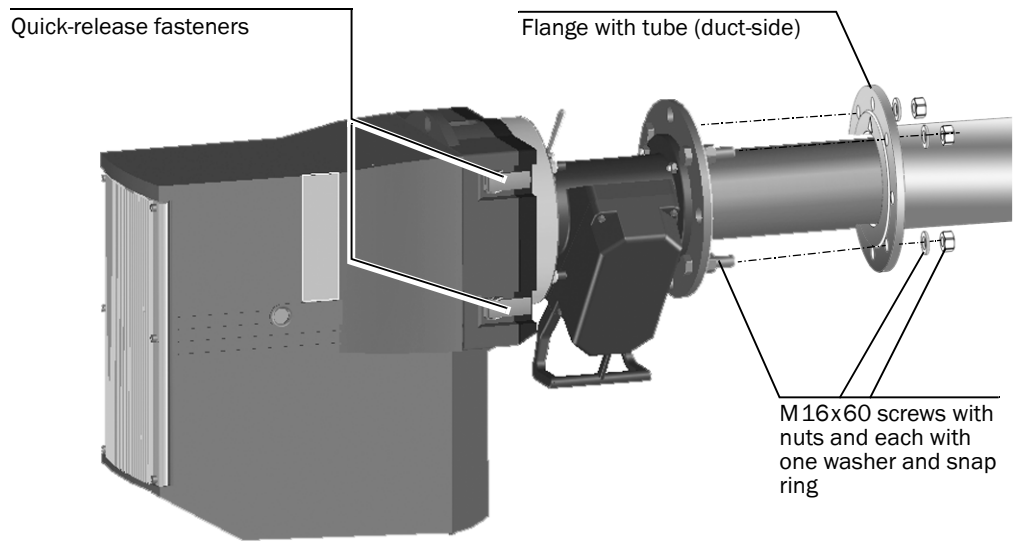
Installing the SR-unit with measuring probe on the duct-side flange
